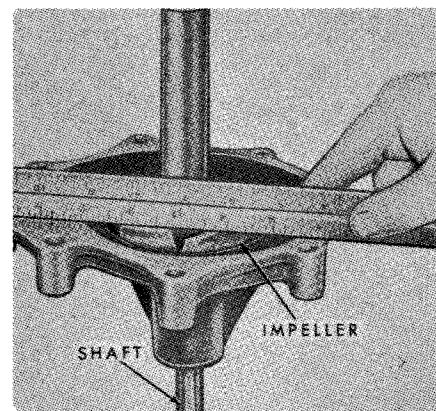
Press impeller onto shaft with 3/4-inch I.D. pipe so that impeller is flush with rear face of housing.
